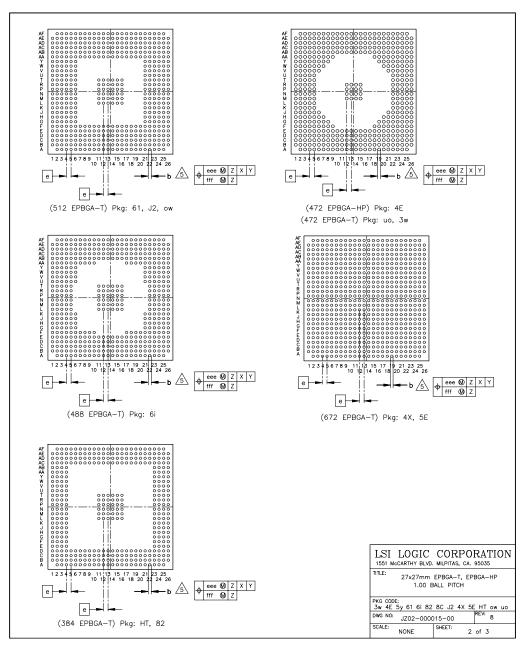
JZ02-000015-00 (5Y) Mechanical Drawing; Bottom View (Sheet 2 of 3)
